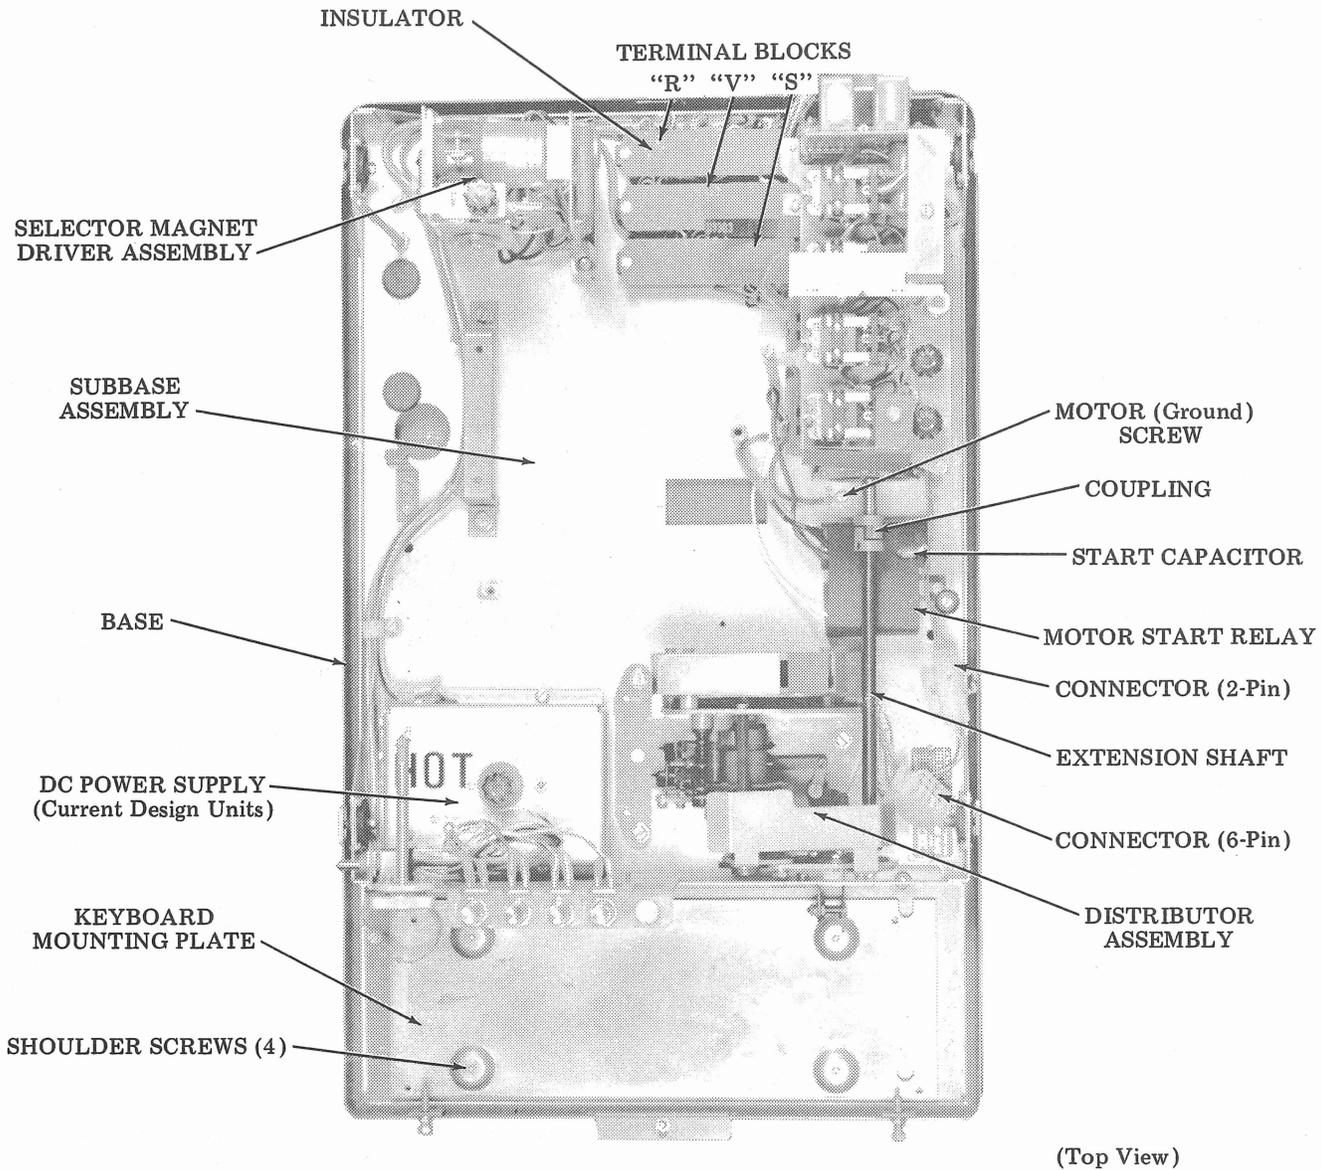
35 Edge Punched Card Typing Reperforator Set Base
